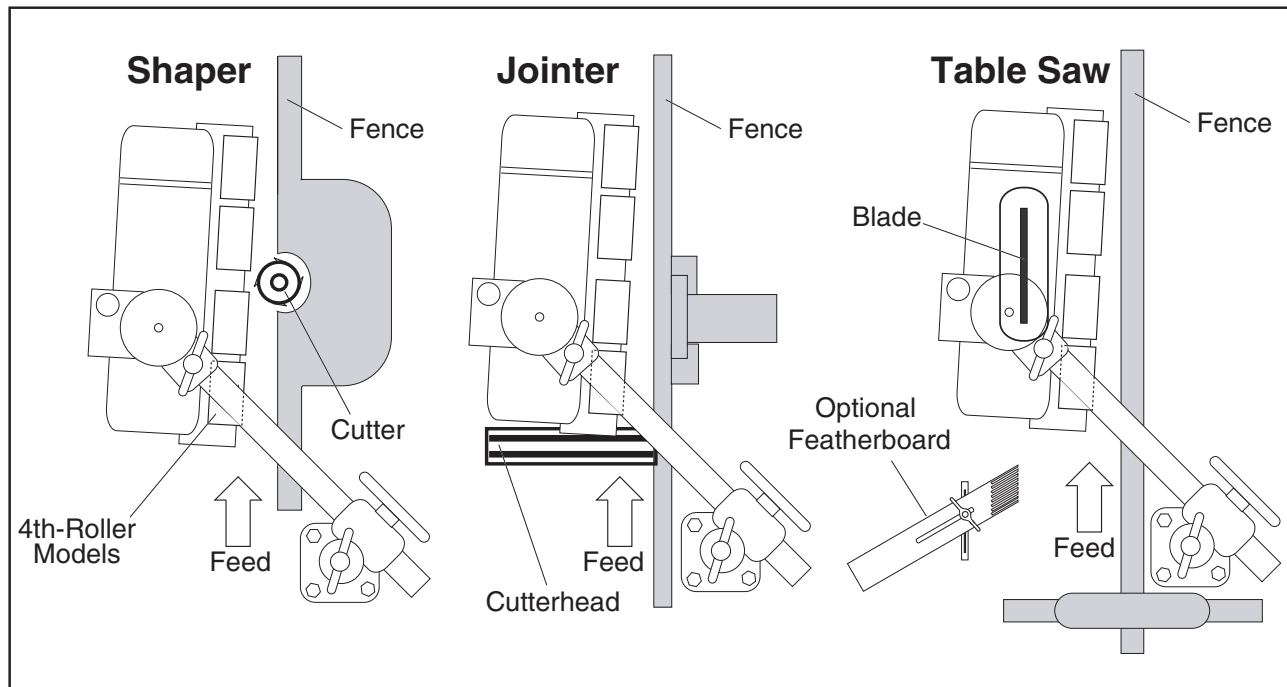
Typical power feed mounting on a shaper, jointer, and table saw.
